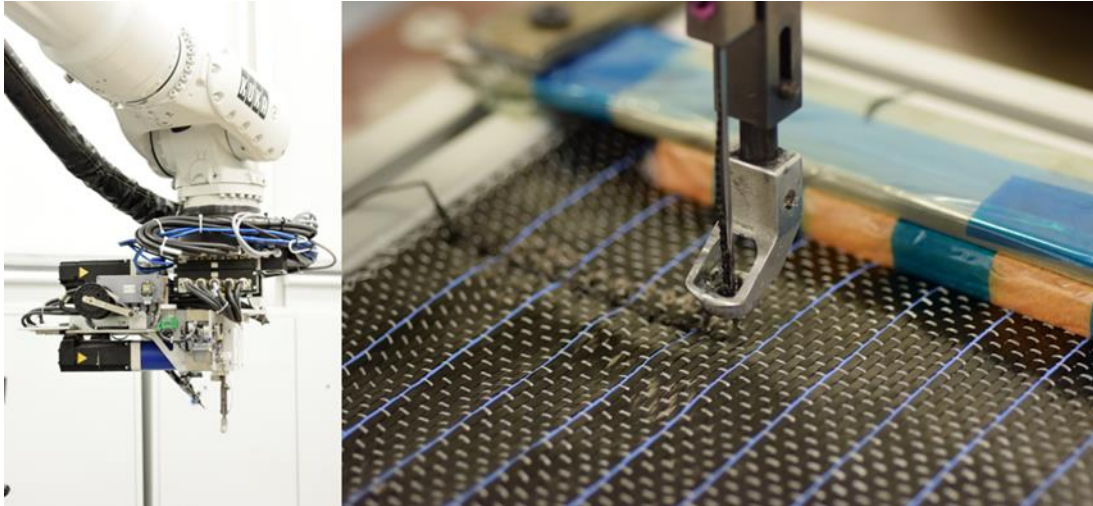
(Left) KSL tufter and (right) tufting needle and UD dry preform in tufting clamp.
